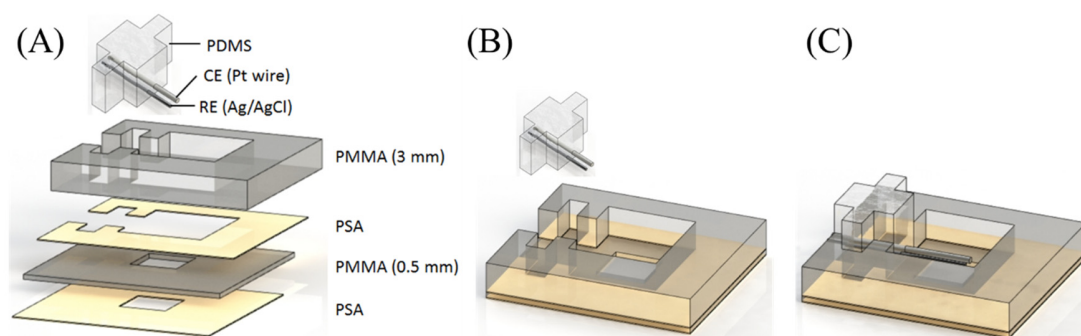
Schematic showing batch assembly for integrating Au-coated nanostructured Si chip as the working electrode (A) exploded view, (B) and (C) progressive integration view.
